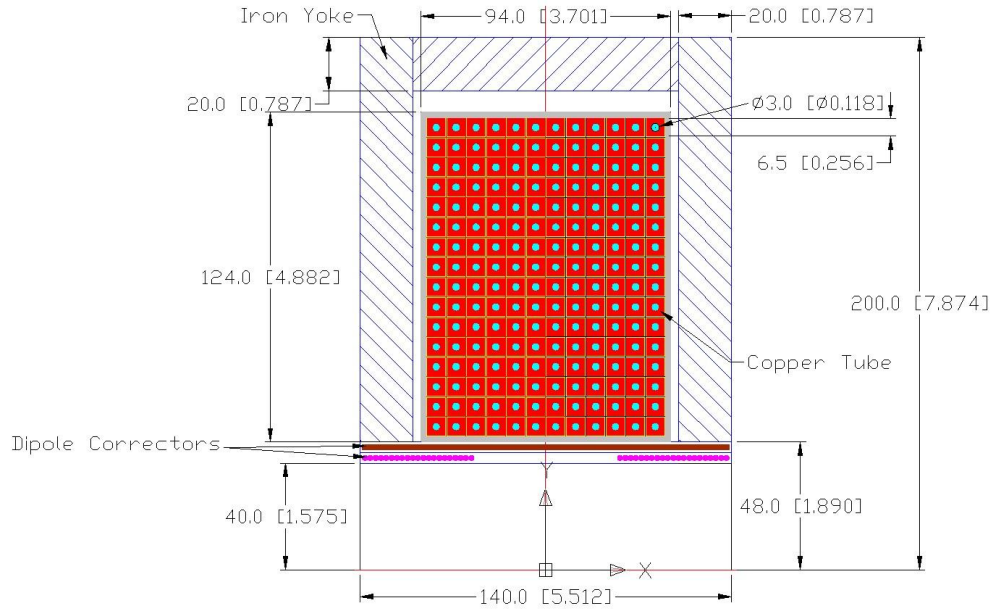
Solenoid geometry. Dimensions are in mm [inch].
